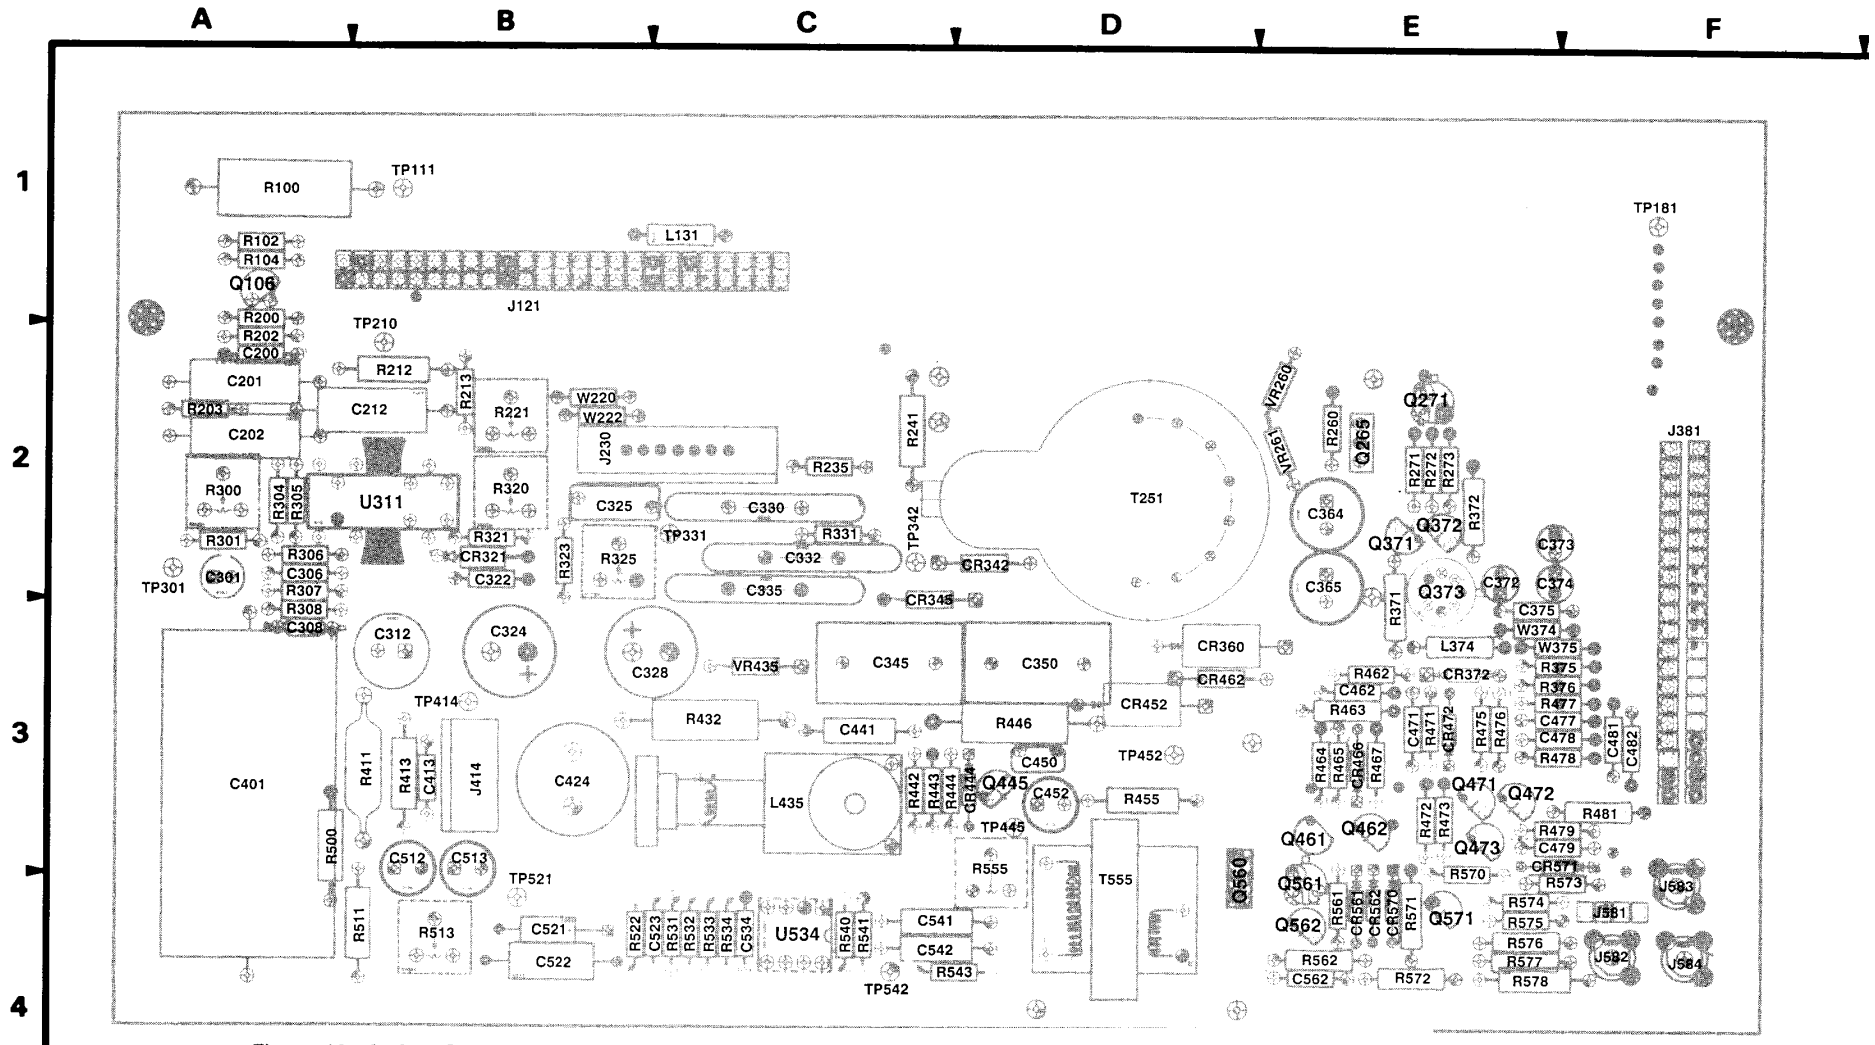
A. A06 CRT Drive Board Component Locations (R090009 & below)
